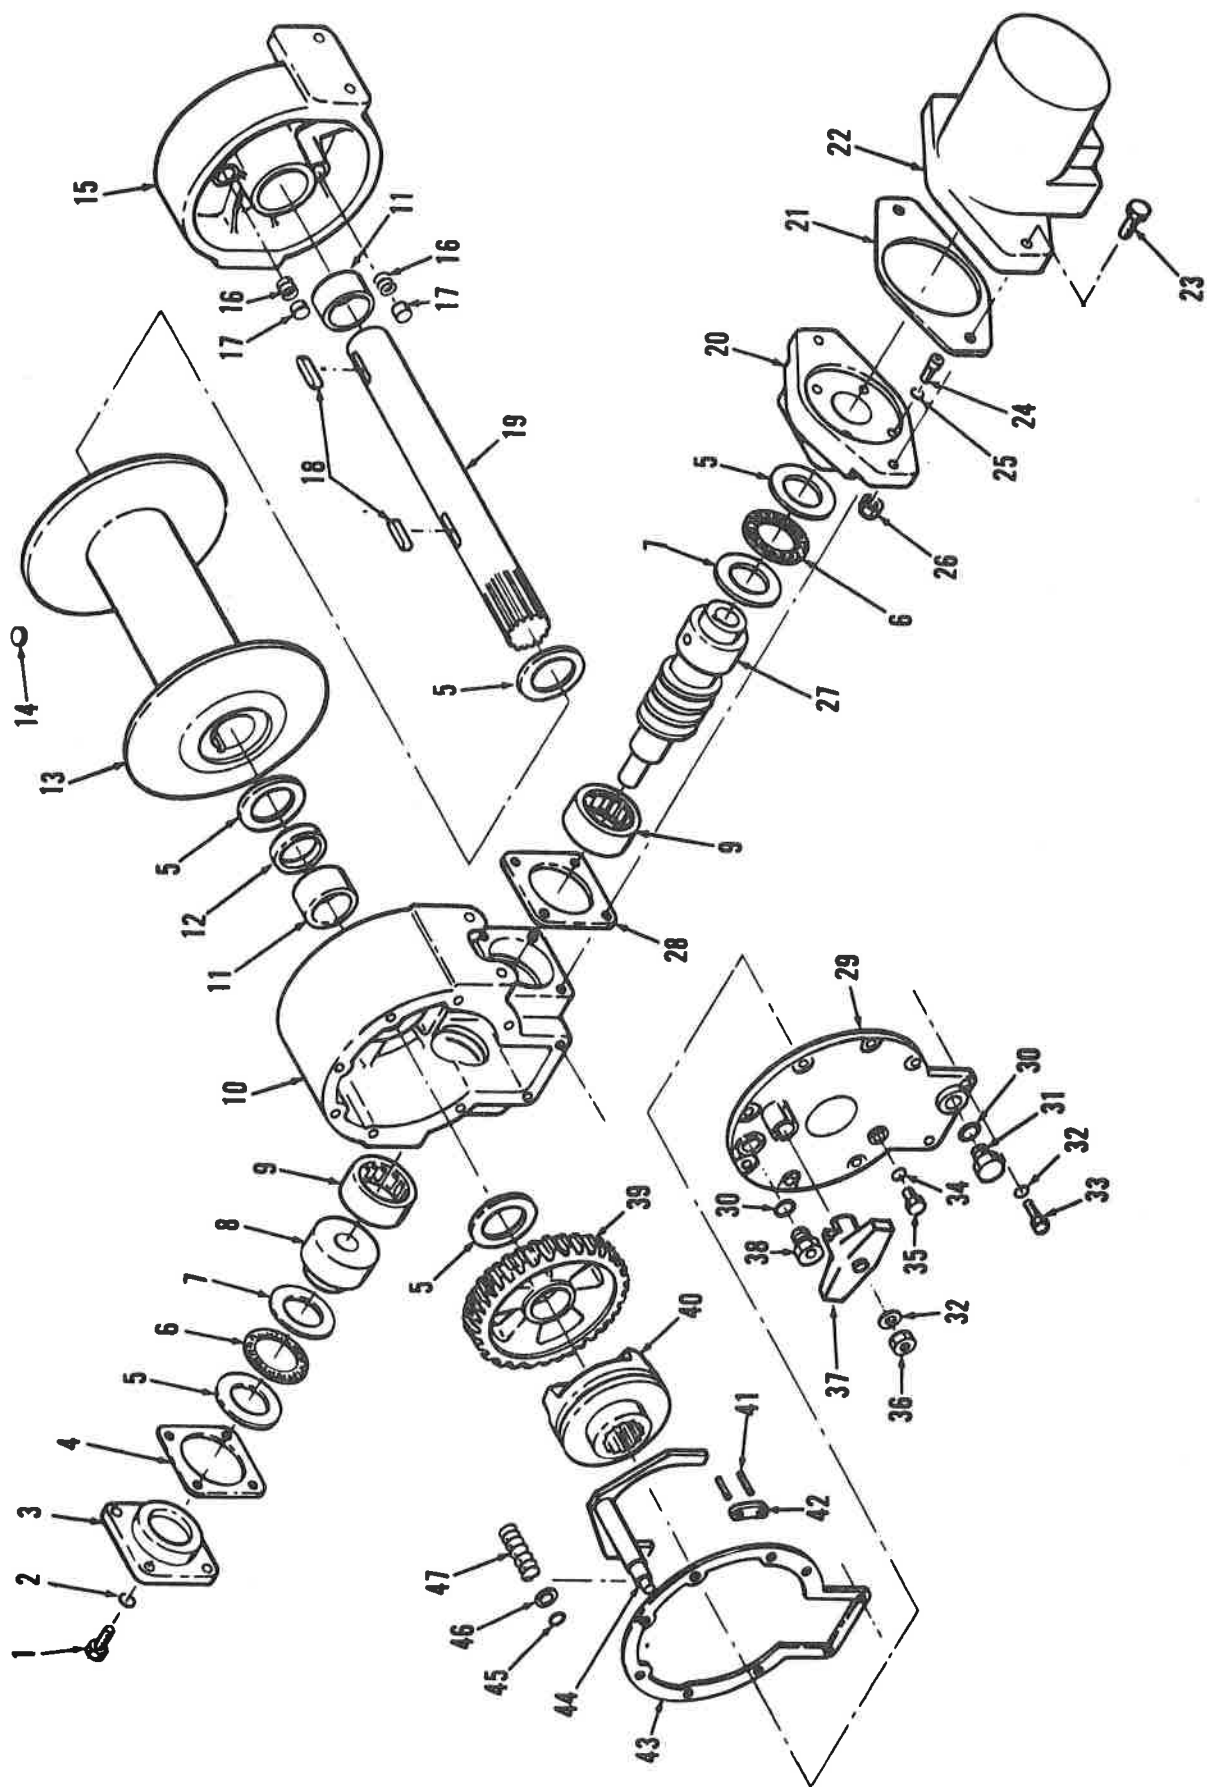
Winch Assembly GV73 with Motor for PT1102 System
